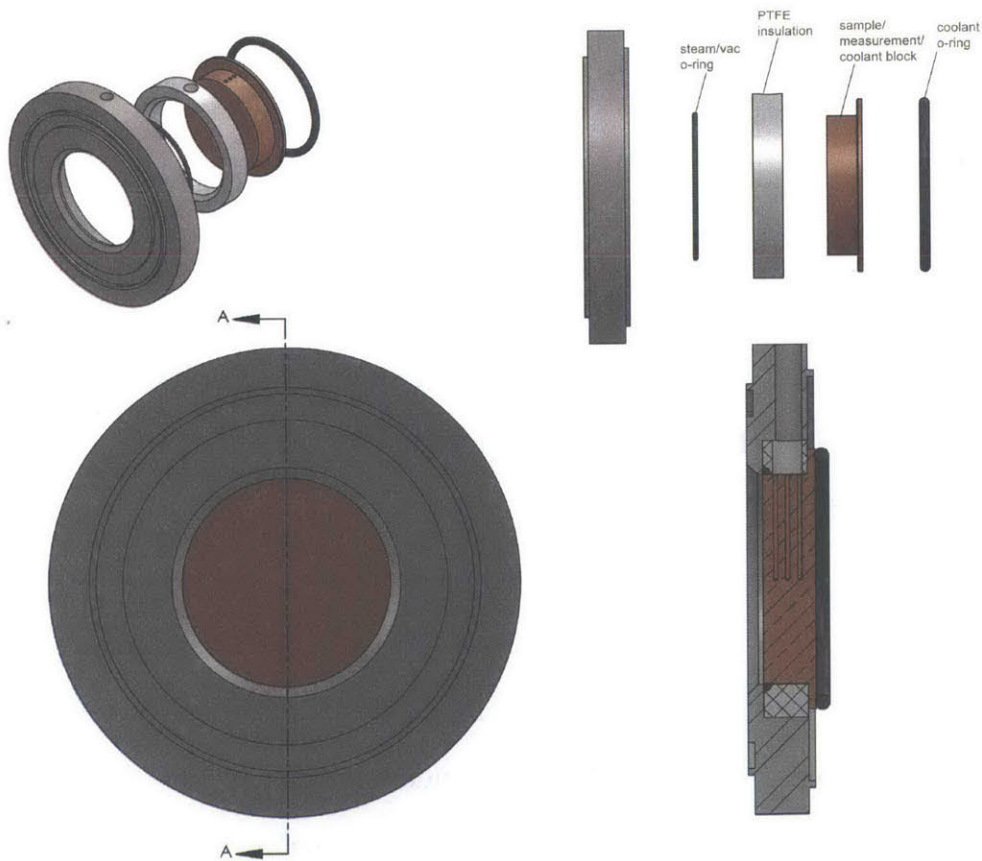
Sample puck subassembly. (a) Isometric exploded view of sample puck along with stainless steel sample plate from condenser chamber subassembly. (b) Exploded view of subassembly showing sequence of insulation ring and o-ring seals. (c) front view of sample puck. (d) Section view A-A of sample puck subassembly showing detail of o-ring seals and thermowells.
